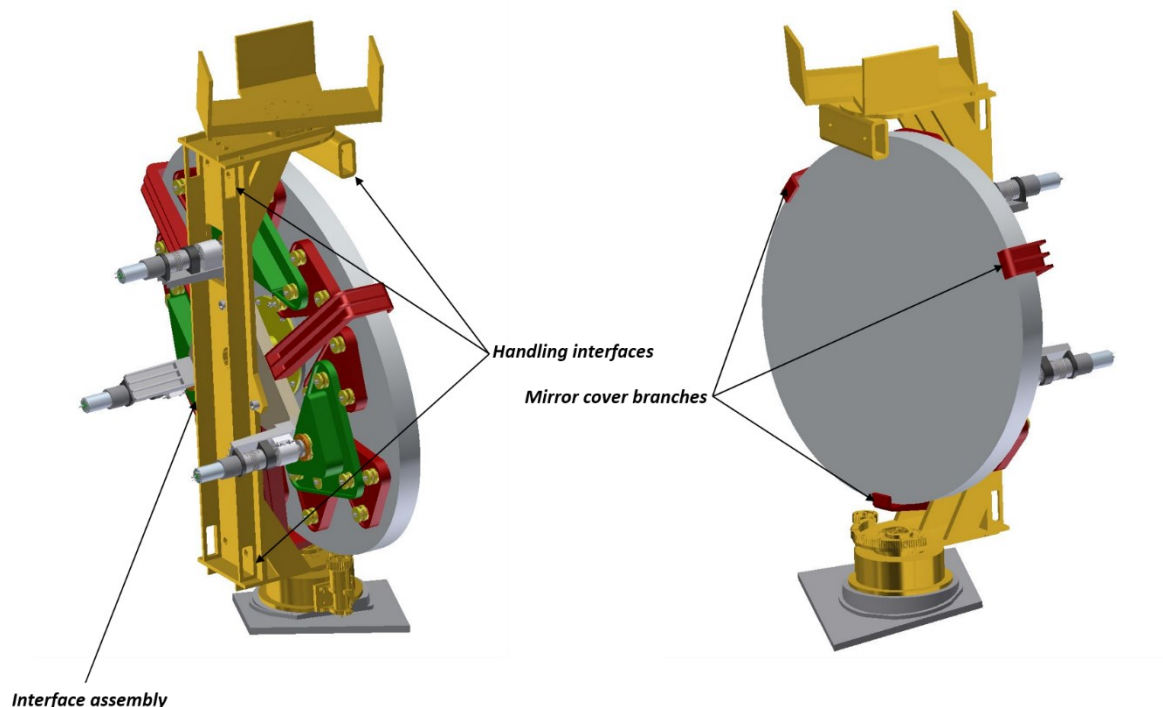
M11 assembly that will be inserted/extracted from the MAORY main structure.
